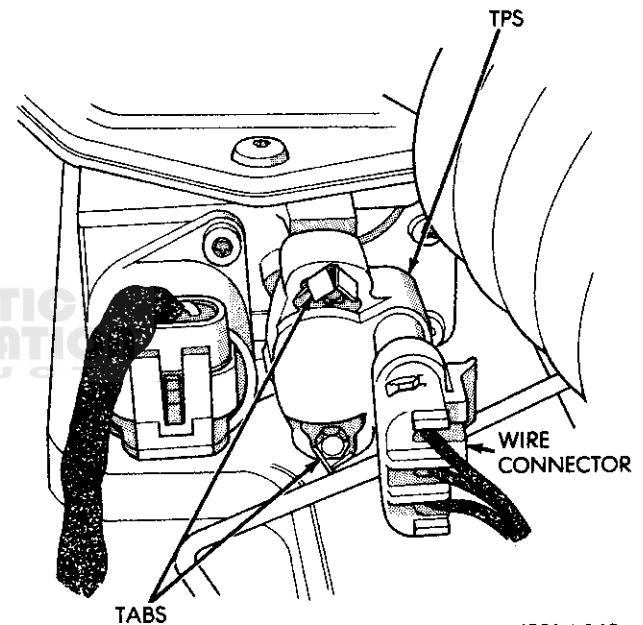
Throttle Position Sensor Remove/Install—Typical
